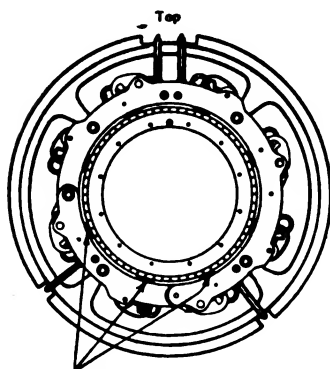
Details of U.S.L. Flywheel Type Dynamotor with Outside Armature
